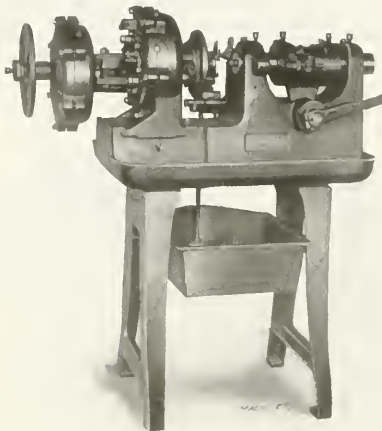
Gorton No. 8-C Universal Fuse Ring Milling Machine
